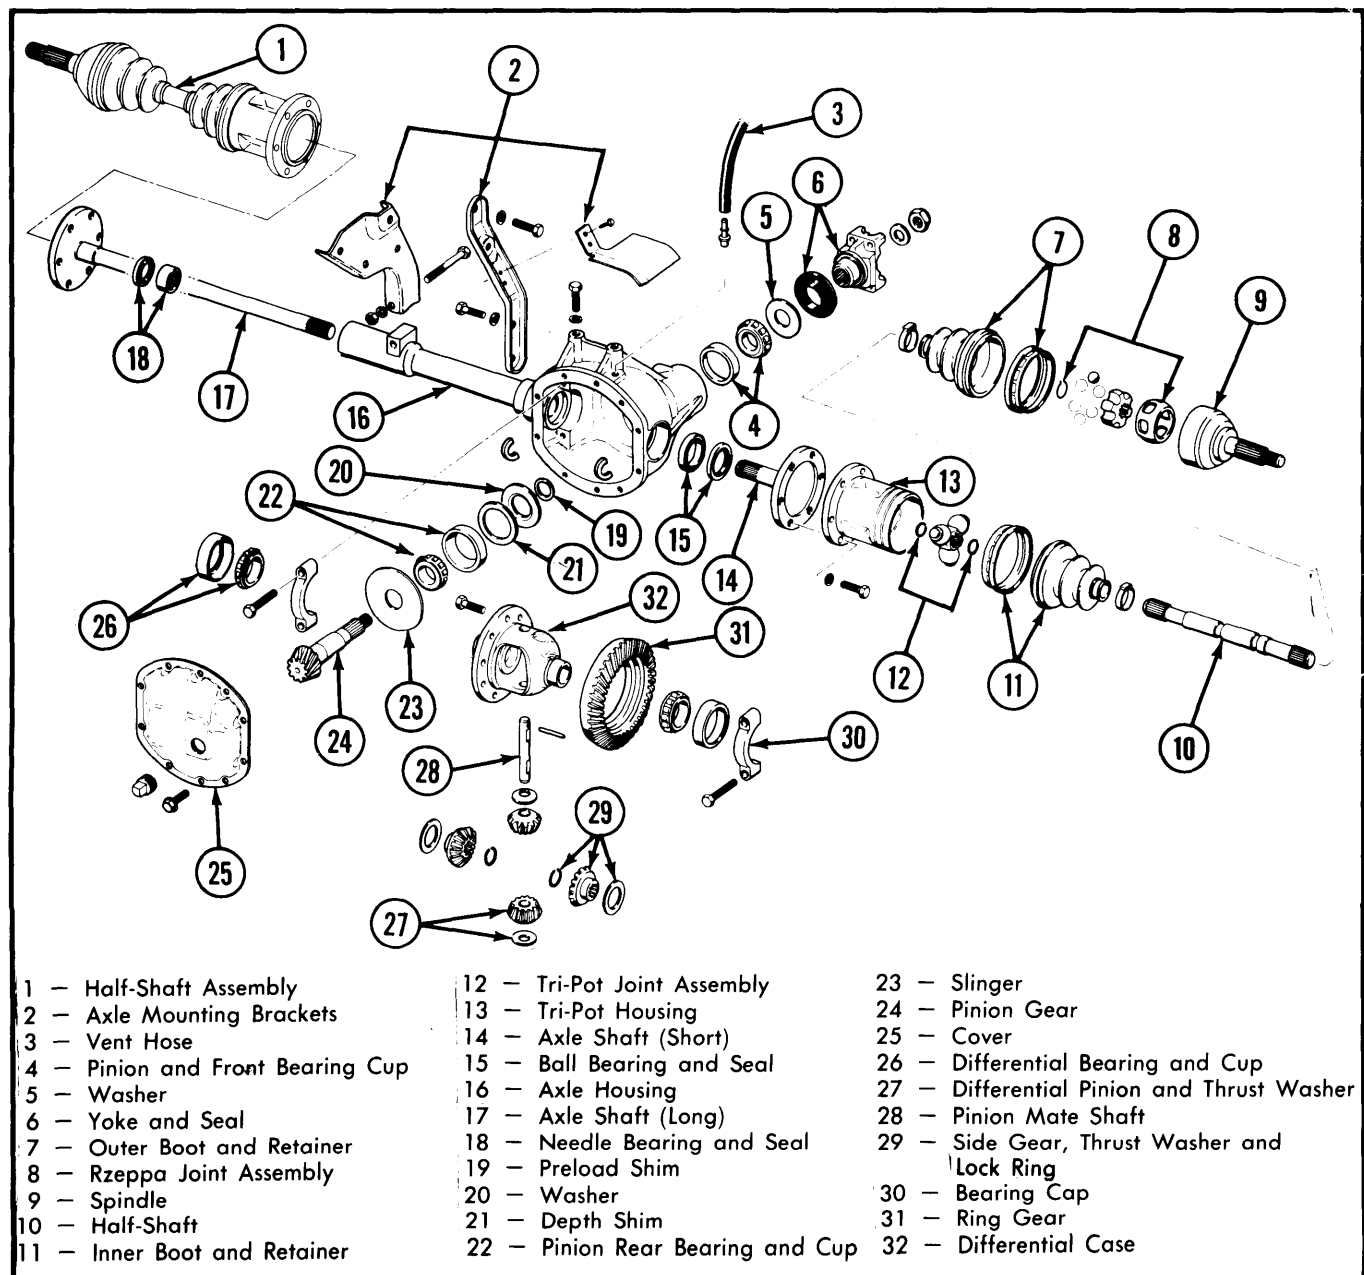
Exploded View of Eagle Front Axle Assembly – Without Optional Select Drive
